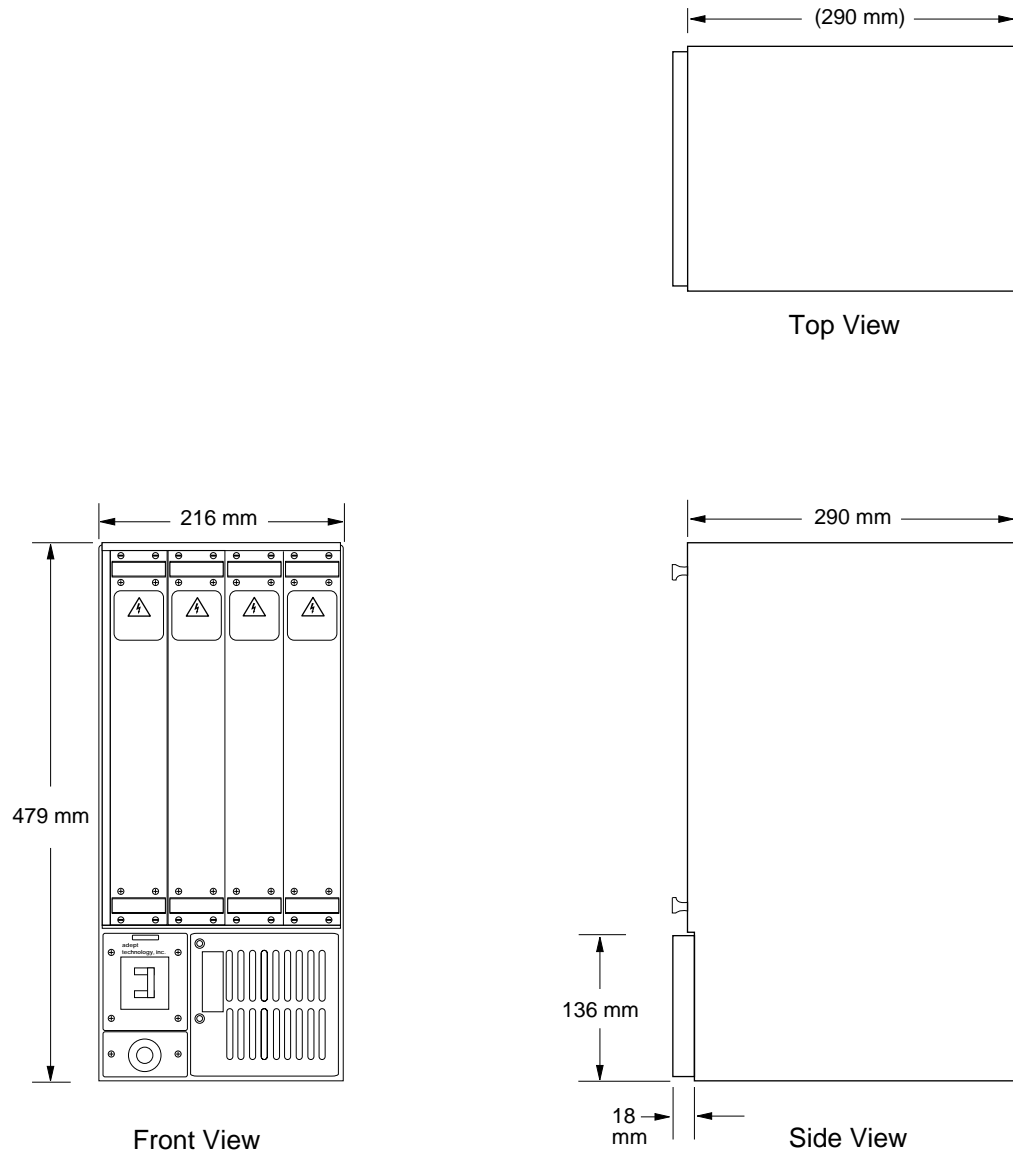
Adept PA-4 Power Chassis Dimensions
